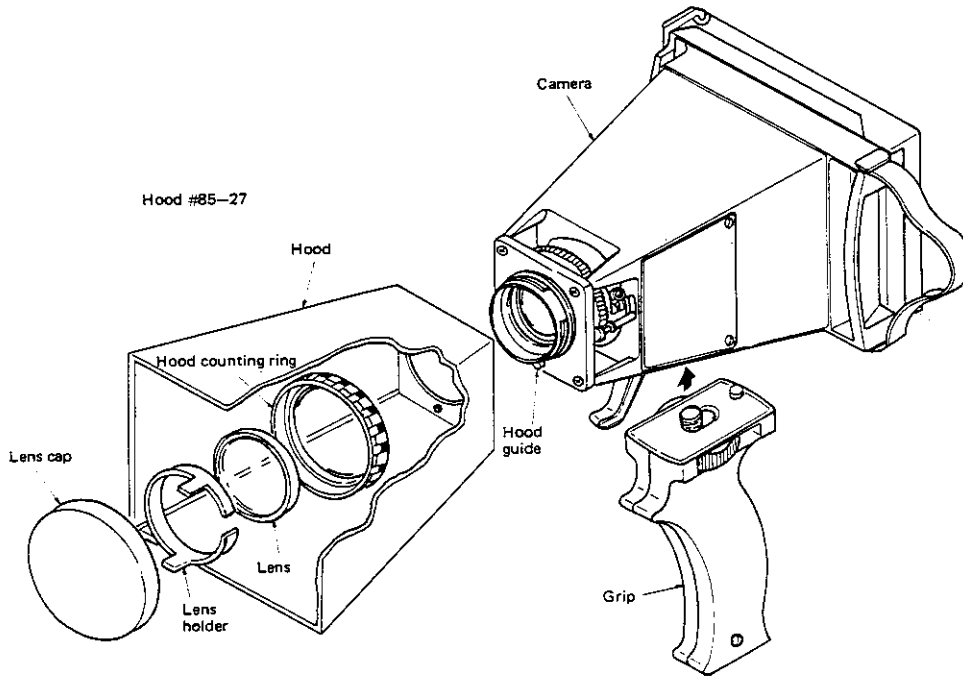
Assembling Polaroid Camera M-085D and Hood #85-27
